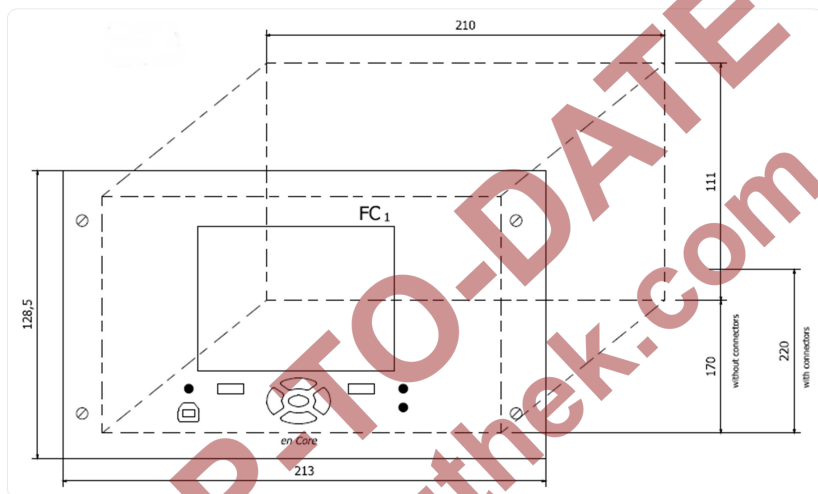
Dimensions for plug-in module 19", 3 U, 42 HP
